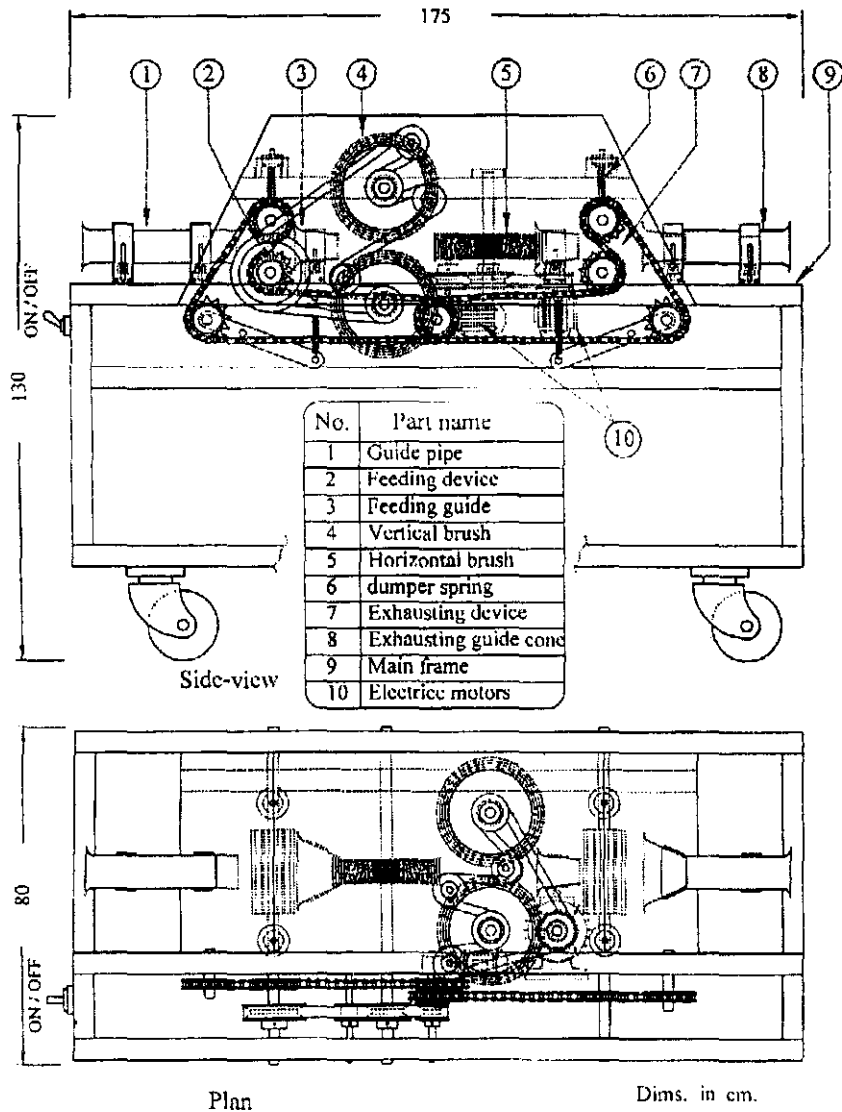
Side view and plan of sugar cane stalks shelling machine.
